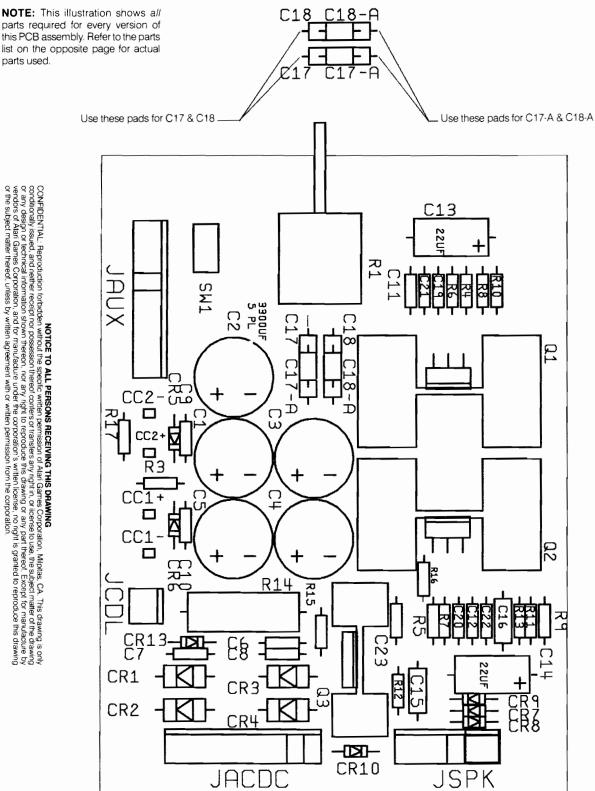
Audio II PCB Assembly A043661-03 and -05 D
